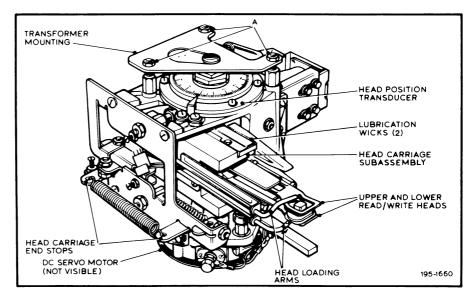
HEAD POSITIONER ASSEMBLY
